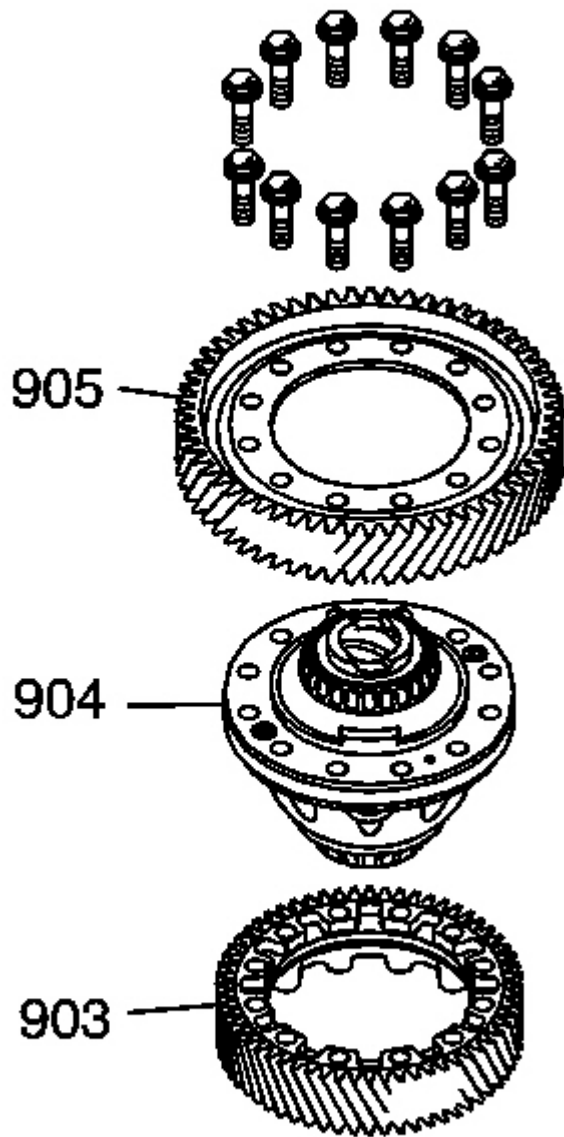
Front Differential, Carrier Bolts & Ring Gear
